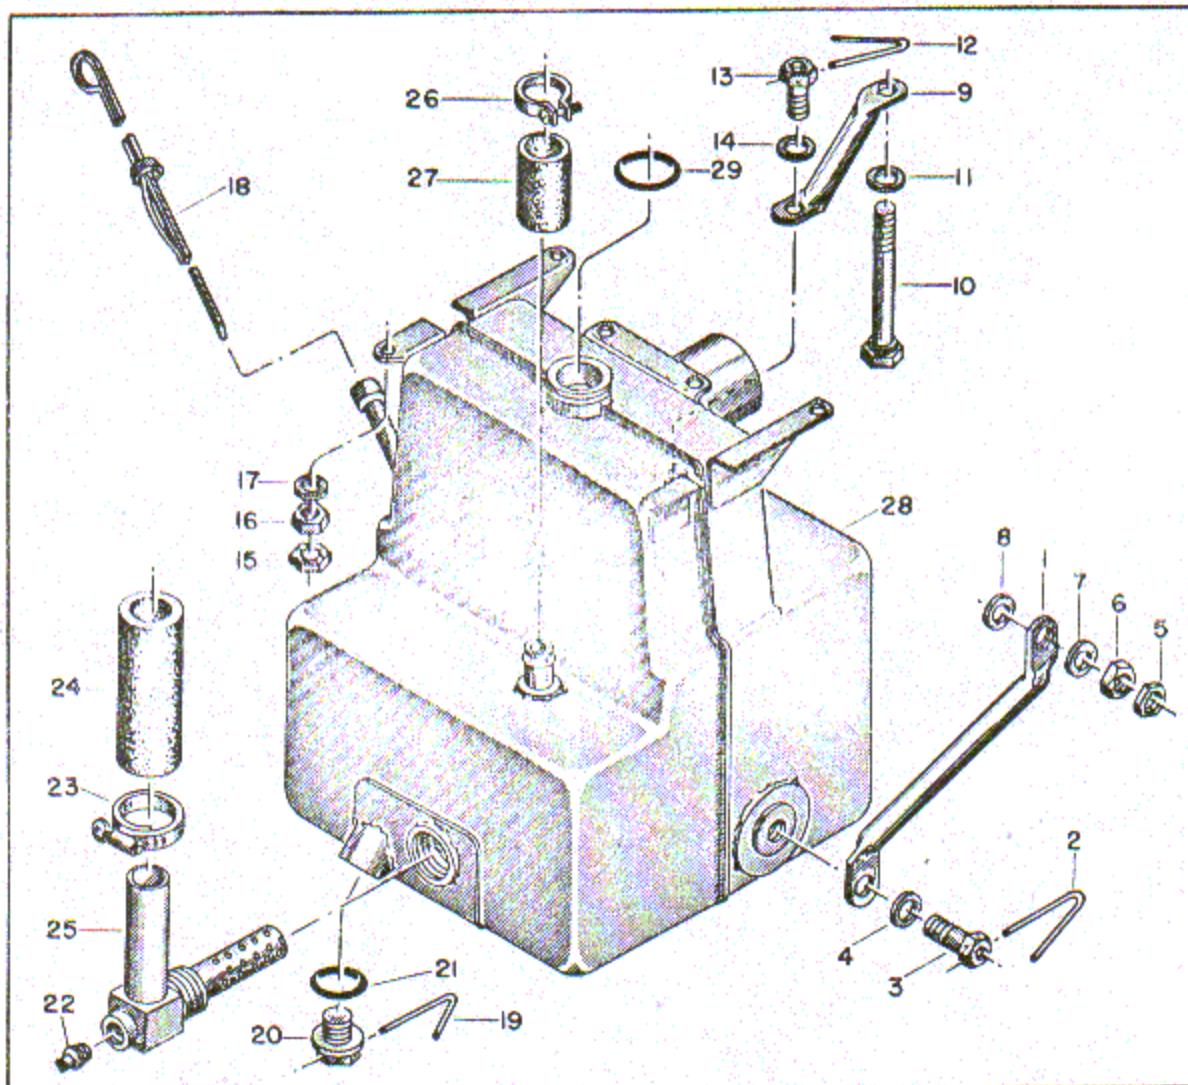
Exploded Parts View of O-470-11 Oil Sump
